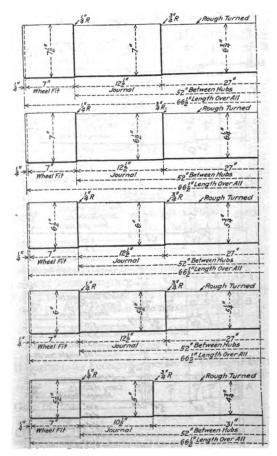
Standard engine truck axles. Adopted the American Locomotive Company.
